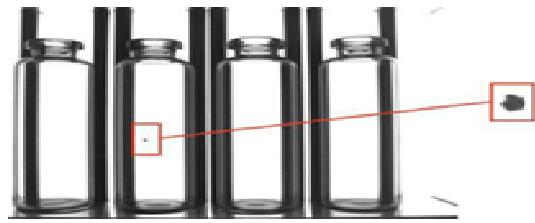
Stone defect detection drawing of tube-type bottle body
